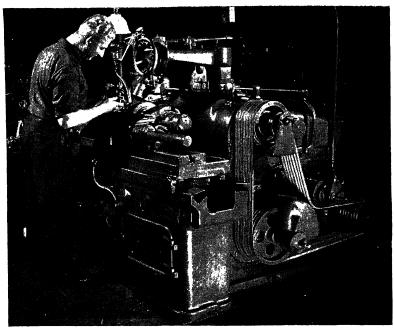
Multiple V belt. Power drive to a grinder from the motor in the rear. This arrangement with the idler pulley permits constant tension on the belts as the grinding wheel is moved horizontally back and forth. (Allis-Chalmers.)
